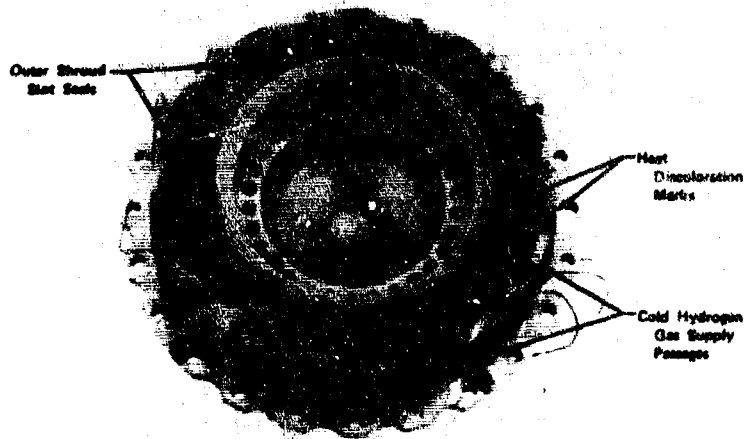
Post-Test 4.01 View of Turbine Inlet Duct Assembly and 1st-Stage Stator (View 2)
